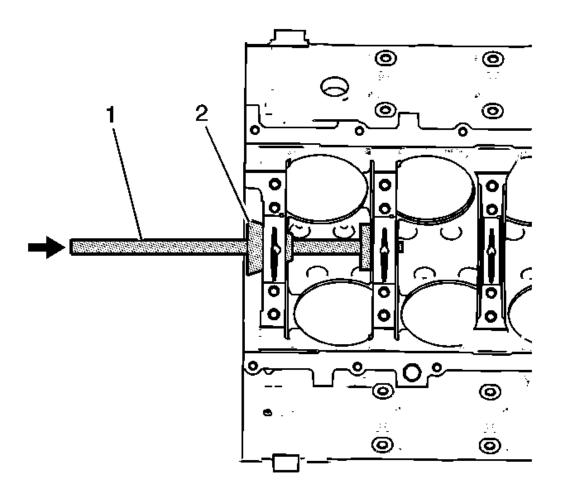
Driving Bearing Out Of Or Into Engine Block Courtesy of GENERAL MOTORS CORP.
